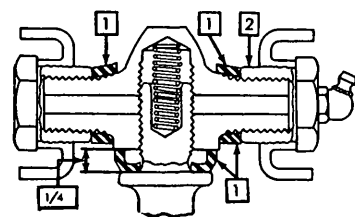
Cross section through upper control arm trunnion on 1950-51 Statesman and Ambassador. A clearance of 1/4 in. should be allowed between lower edge of trunnion and seal seat. 1. Rubber seals. 2. Trunnion bushing
